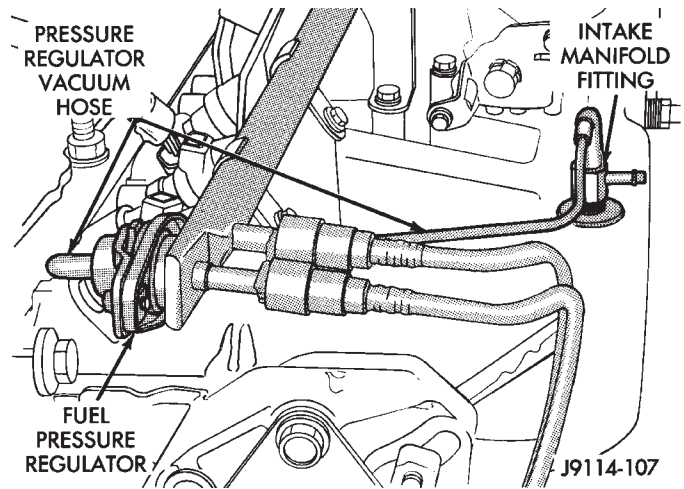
Fuel Pressure Regulator—4.0L Engine
